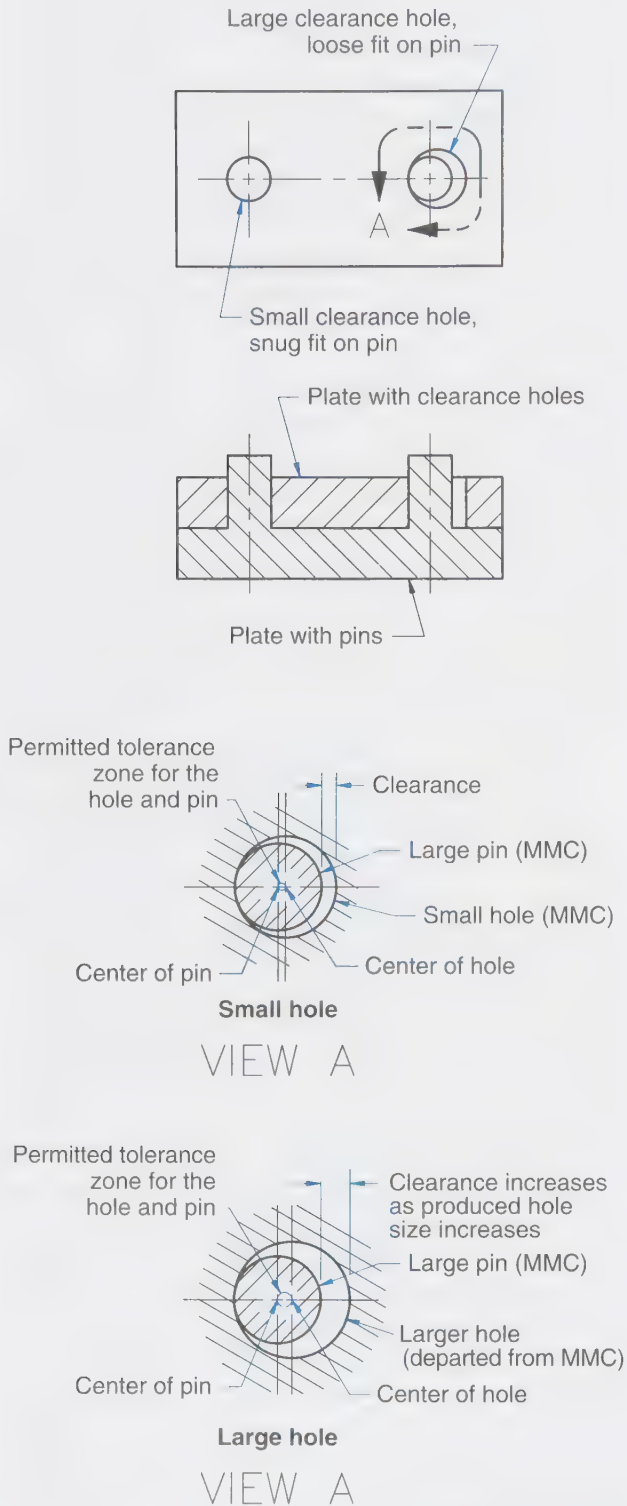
A hole with a large amount of clearance can tolerate a larger location variation from true position than can a close-fitting hole.
